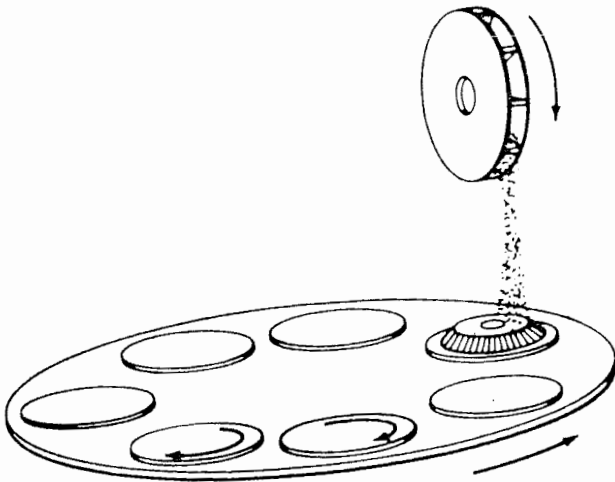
The general arrangement used in the shot-peening of bevel gears.
